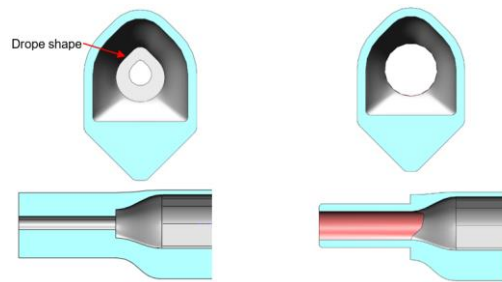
Inner shape after AM print (left); Inner shape after machining (right)
